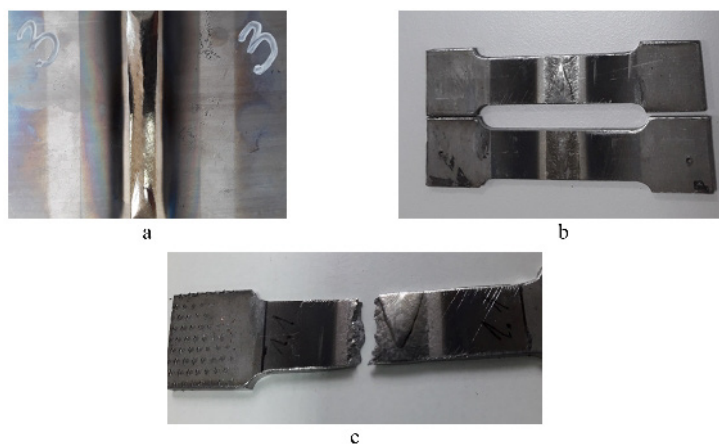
General appearance of produced welds (a); specimens for tensile testing (b); fractured after tensile testing specimen (c)
